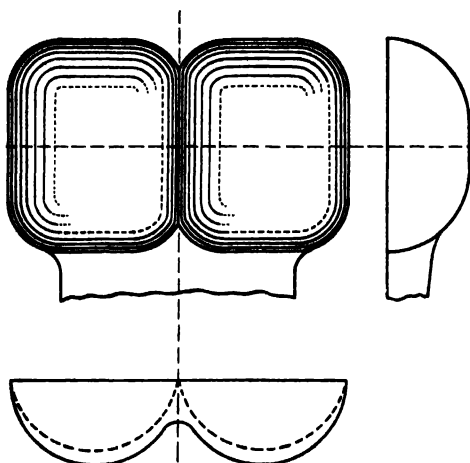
PELTON WHEEL BUCKETS (EXTERNAL VIEWS)
